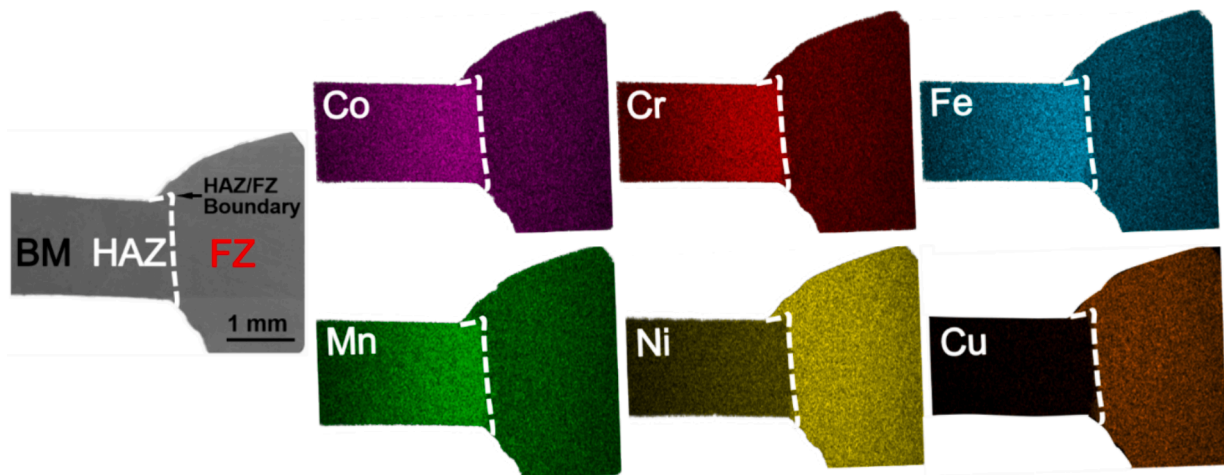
EDS mapping of welded joint. Cu is only observed in the FZ since it comes from the Monel 400 filler material used for welding the CoCrFeMnNi HEA.
